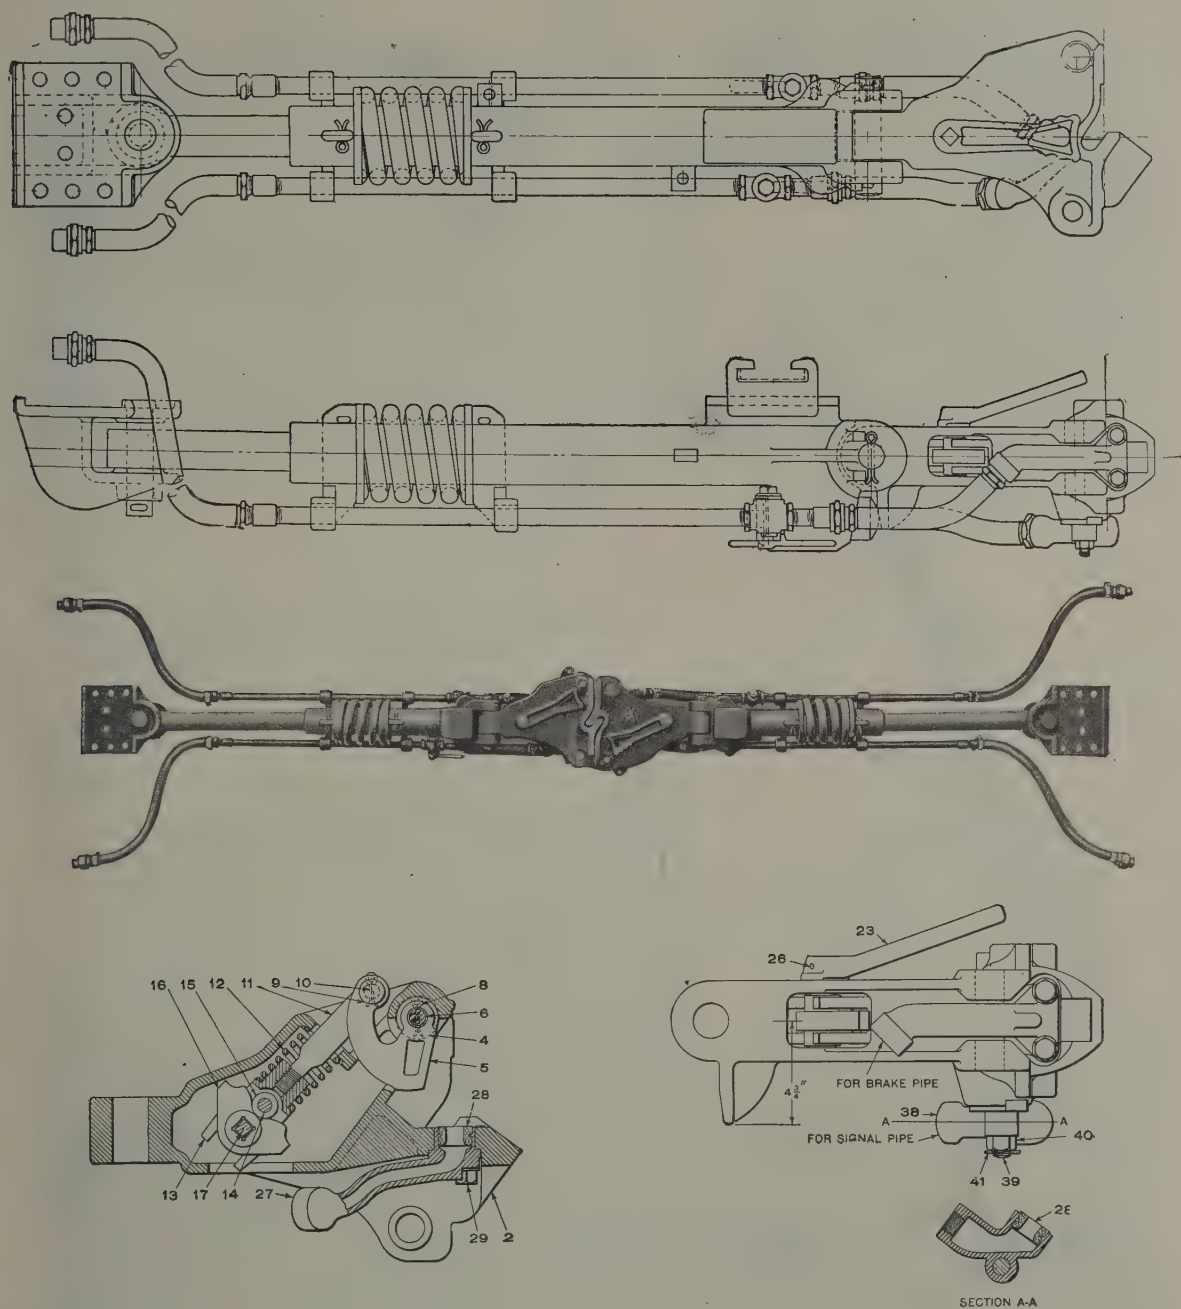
Westinghouse Automatic Car and Air Coupler, Type C-3-A, with Draft Gear, Anchor Castings, Etc.
